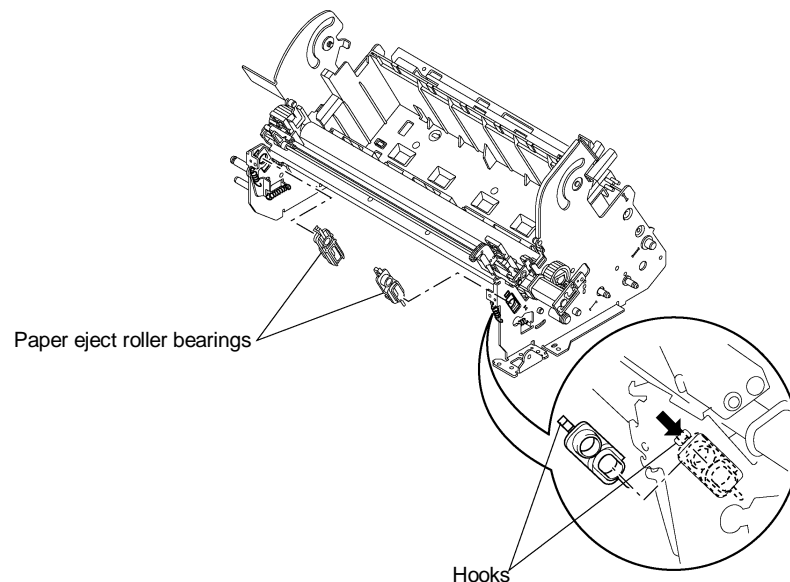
Removing the Paper Eject Roller Unit 2
